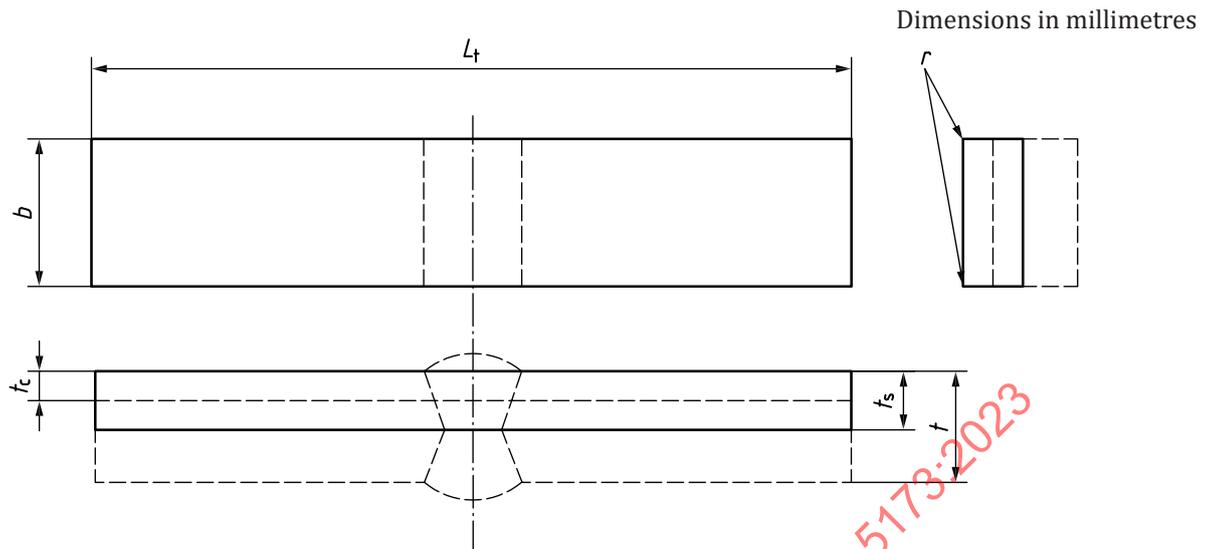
Side bend test specimen for cladding without a butt weld (SBC)
